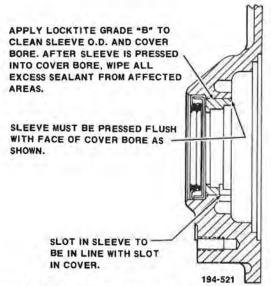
Sectional View of Main Drive Pinion Bearing Cover Assembly (Current Production)
